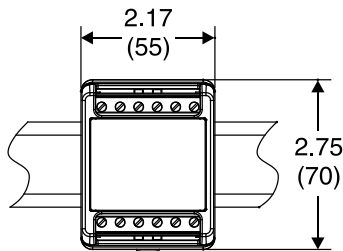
Narrow Case Size in Inches (millimeters) (Front View)
